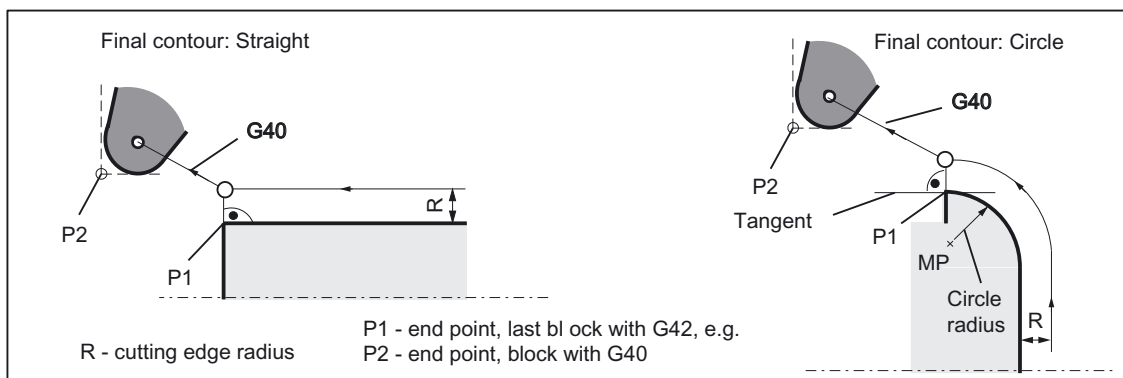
Ending the tool radius compensation with G40, with the example of G42, cutting edge position =3
